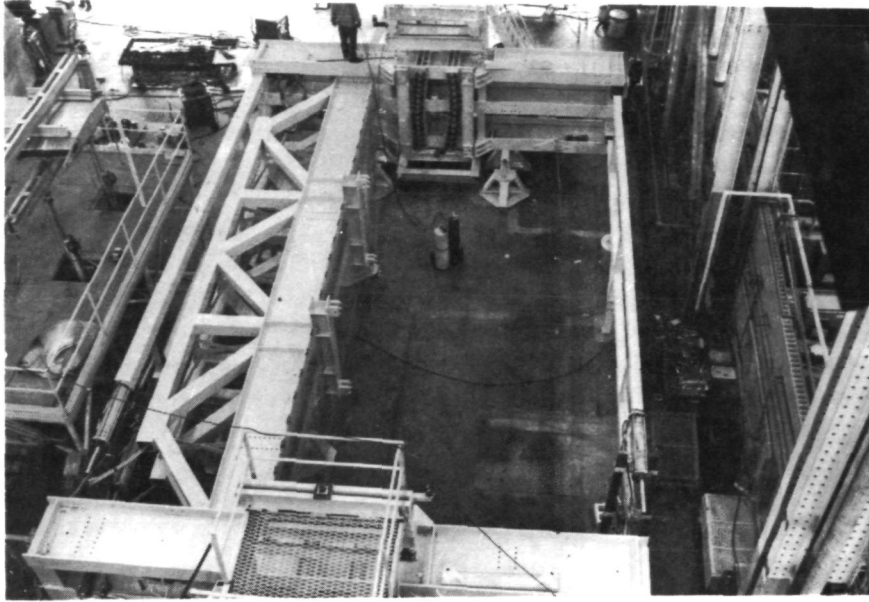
TEST FIXTURE PRIOR TO WING BOX INSTALLATION
